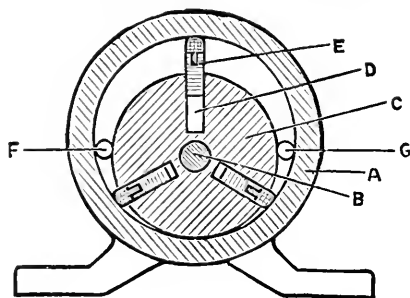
NEW VALVELESS AIR COMPRESSOR
